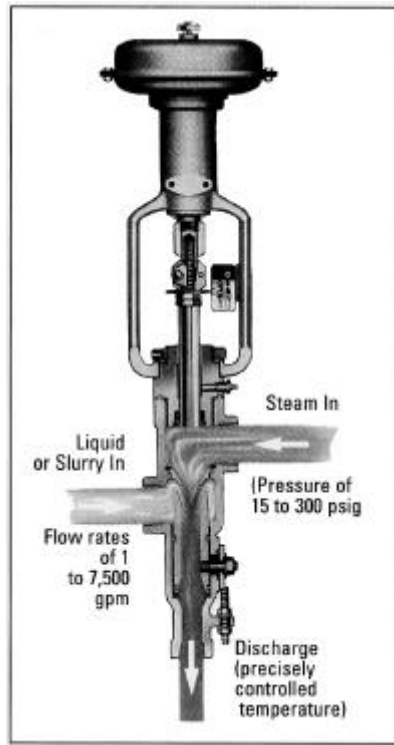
Internal modulation uses a stem/plug assembly inside the heater to adjust flow.
